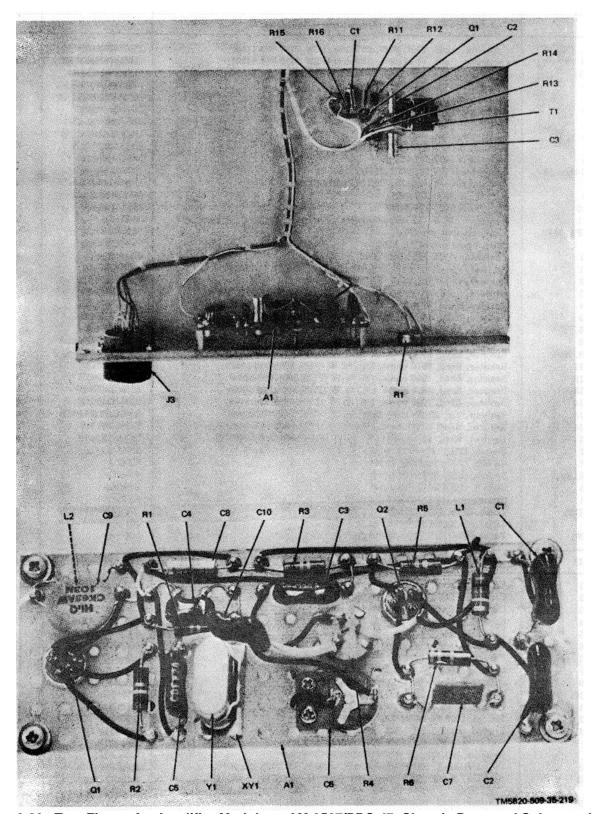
Test Fixture for Amplifier-Modulator AM-3507/PRC-47, Chassis Parts and Subassembly A1 Placement.
